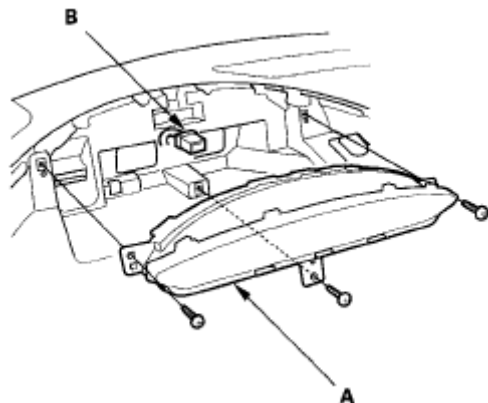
Removing Gauge Control Module Screws (Speedo)
